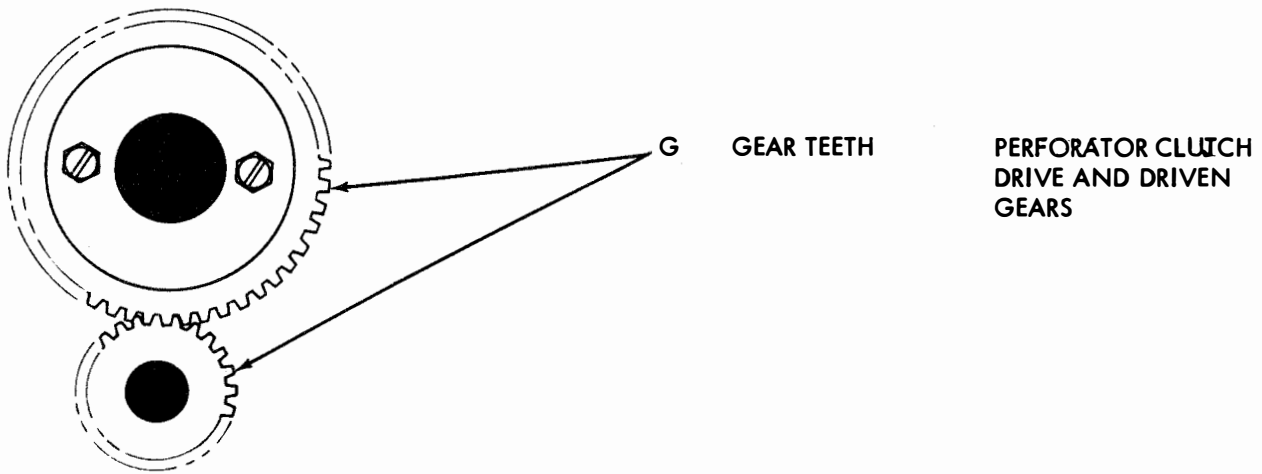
Perforator Clutch Gear Mechanism (Non-Typing)
